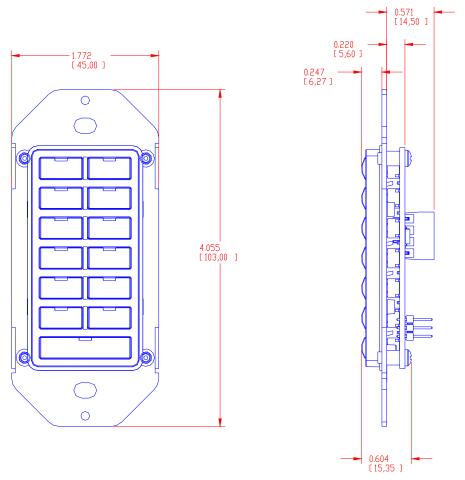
MET-13 and DAS-MET-NUM Mounting Dimensions
